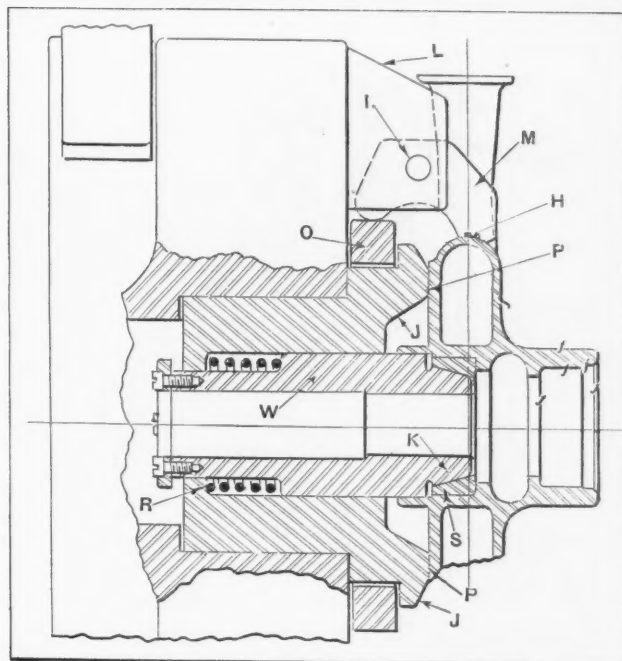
Cross-section of Compensating Jaw Chuck and Work
